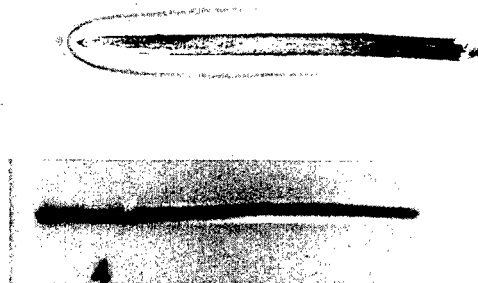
R-13935 - Radiograph and Photograph of a Weld in 0.04% C Deoxidized Molybdenum Made Under Welding Grade Argon
